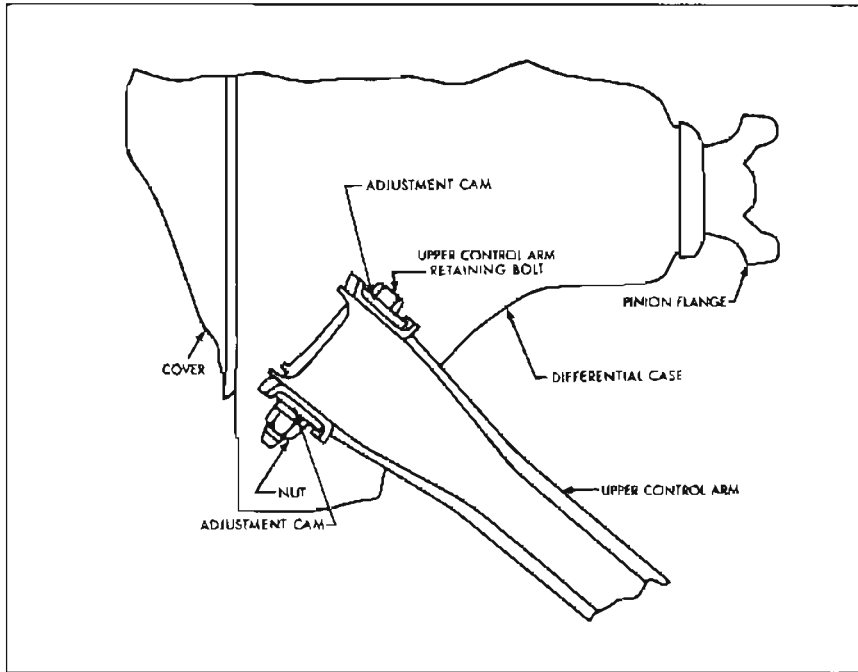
Upper Control Arm Cam Bolt Adjustment Assembly for Service Replacement
